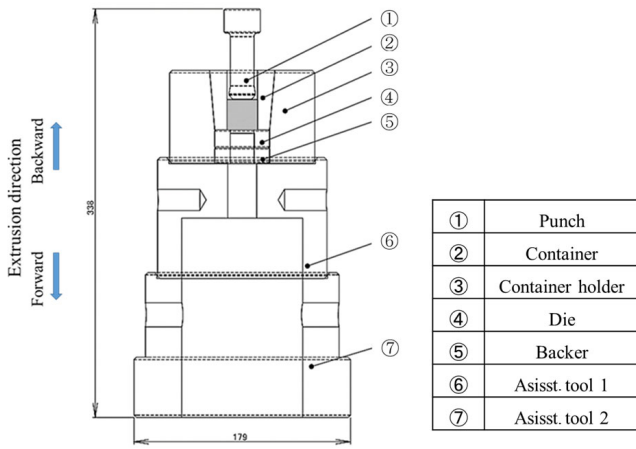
Assembly drawing of hot forward–backward extrusion friction test tool.
